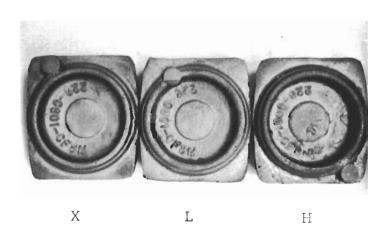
Top and Bottom of Three Representative Castings from Coated Mold (one from uncoated section)
